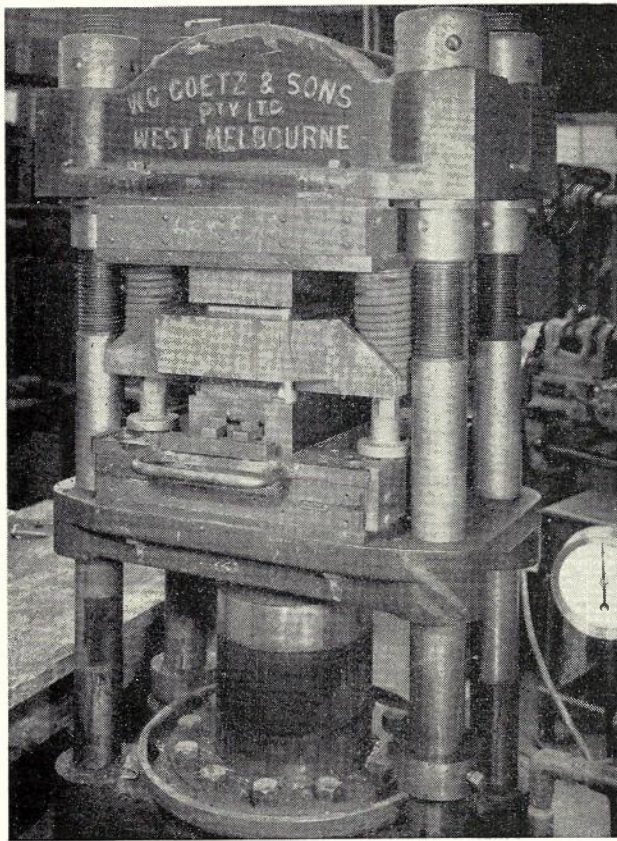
Transmitter and receiver housing component. Press "set up" —moulding position.
